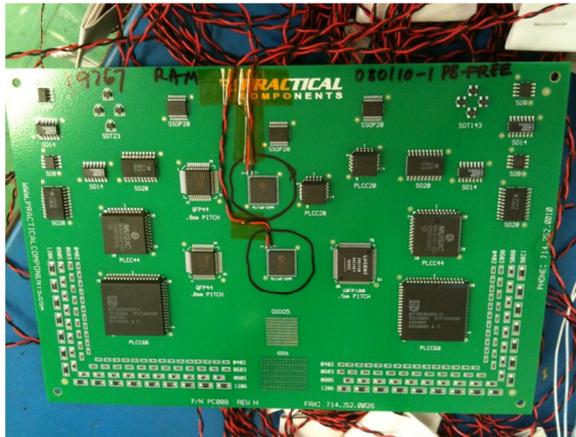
Optical photograph of bottom view of the test board (5.5" x 8")
